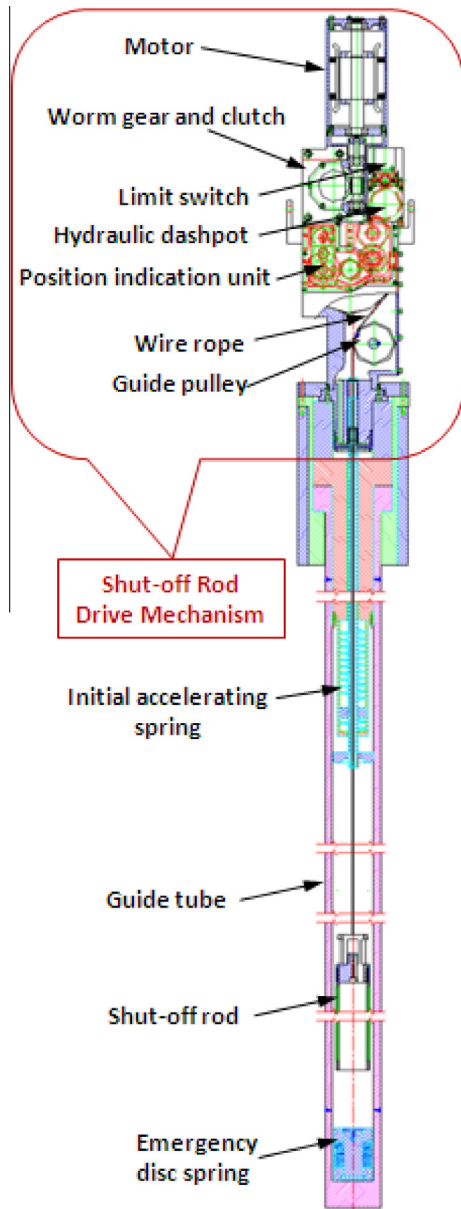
General arrangement of shut-off rod drive mechanism along with the guide tube components.
